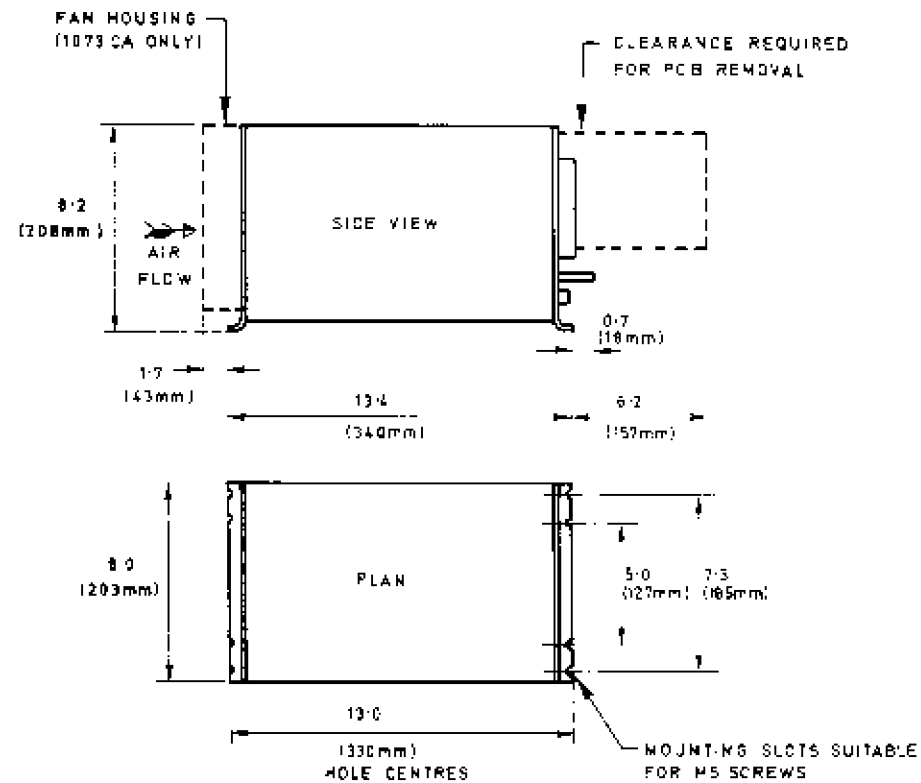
DIMENSIONS & LOCATION OF MOUNTING POINTS
